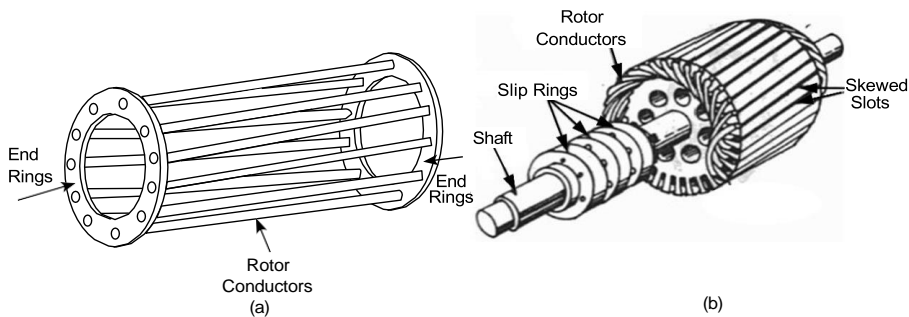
3- Phase induction motor (a) Squirrel cage (b) Wound rotor
